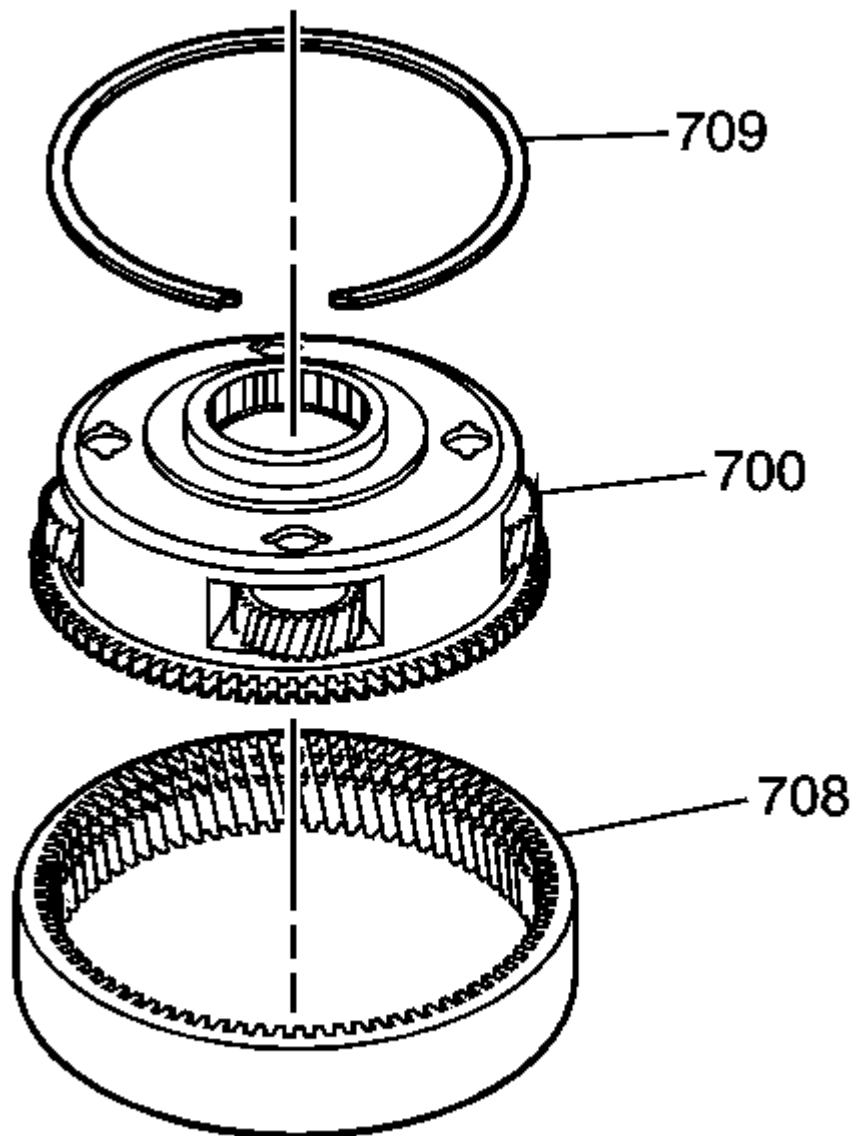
View Of Input Carrier Assembly, Reaction Internal Gear & Snap Ring
